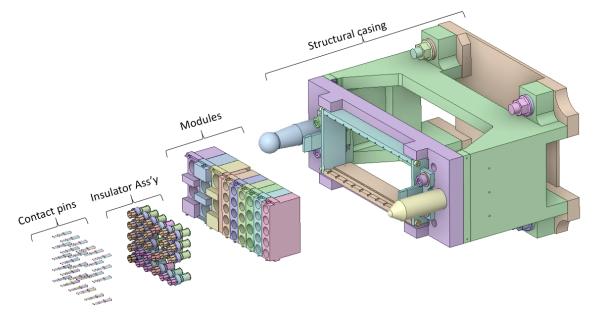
Sub-assemblies which DSM male connector assembly is composed of
